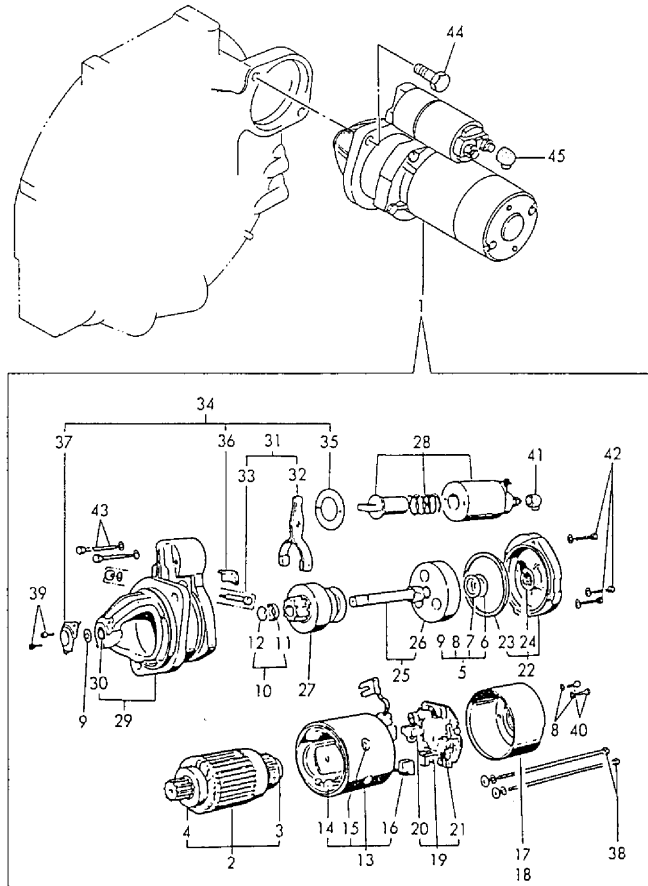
STARTING MOTOR(COMPONENT PARTS)
